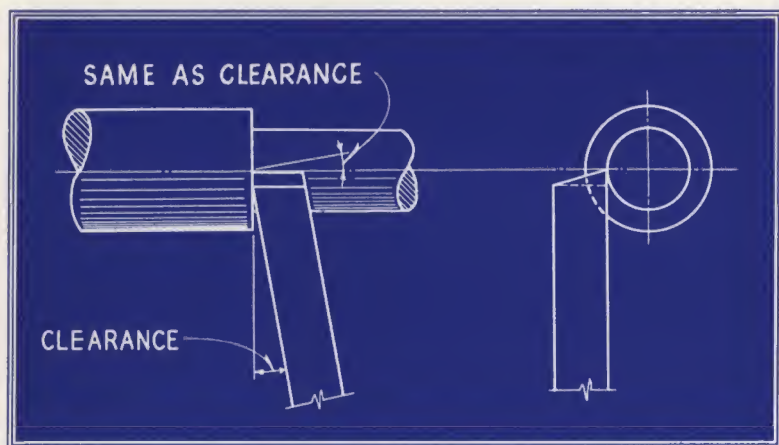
Box tool for machining Alcoa 11S-T3 alloy.
